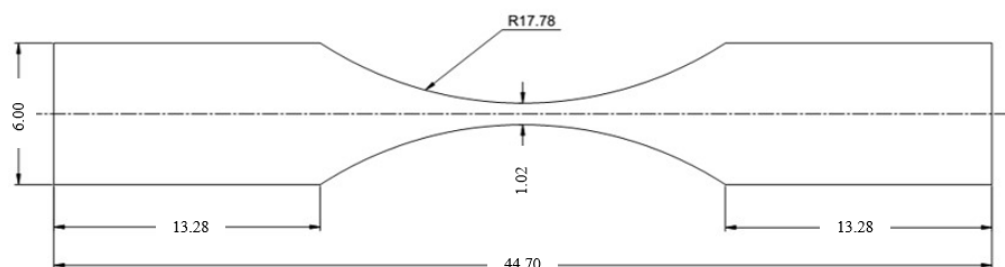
Dimension of micro-tensile hourglass-shape test specimen
